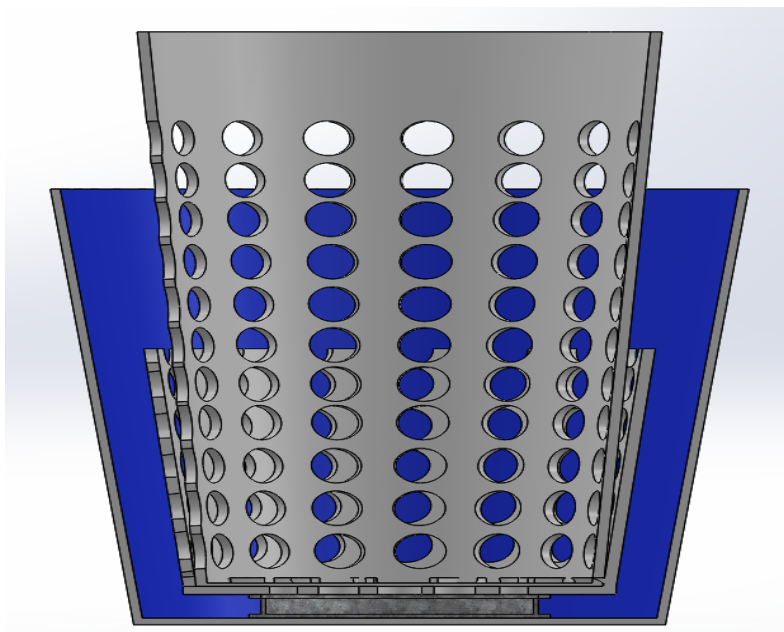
Area 1 – Bucket with a strainer and bearing plate [Section View]
